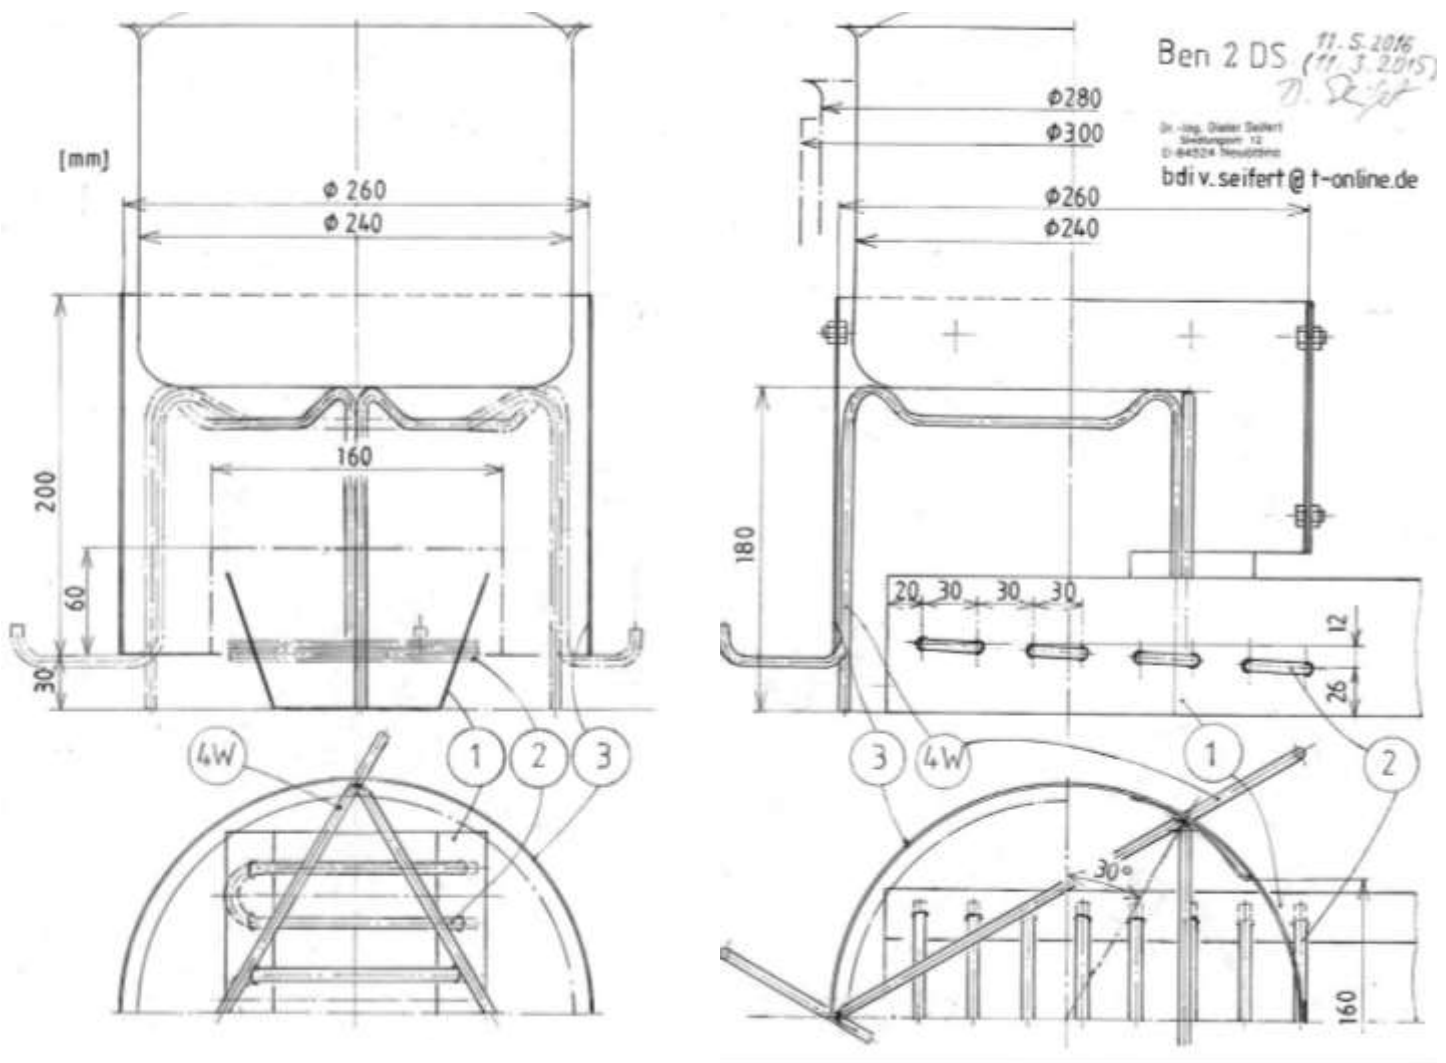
Assembly Drawing: Front views and top views Ben 2 (May 2016)
